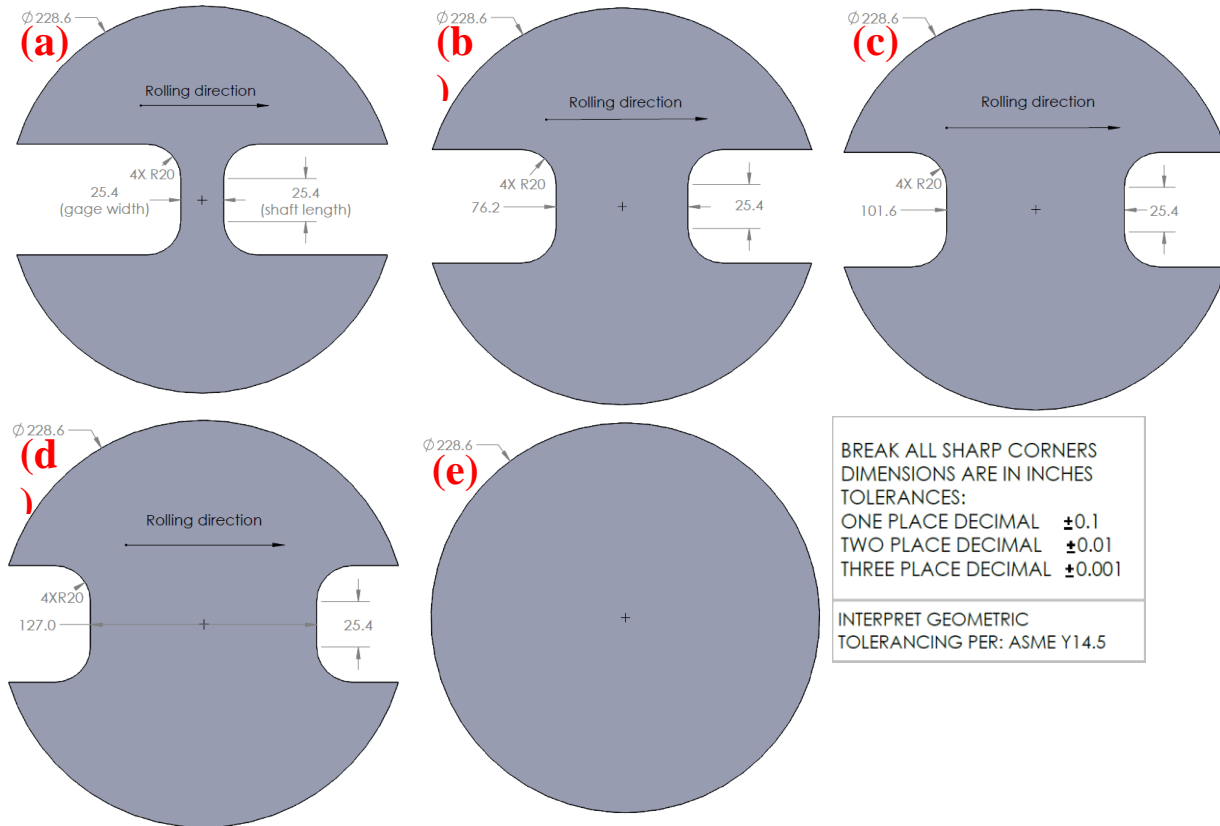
PHS1800 sample geometry used in Nakazima tests according to ISO12004-2. All geometries have a shaft length of 25.4 mm. Gage width: (a) 25.4 mm (b) 76.2 mm (c) 101.6 mm (d) 127.0 mm (e) Equibiaxial with 228.6 mm diameter circle.
